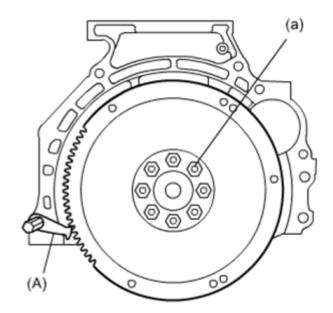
Identifying Flywheel Bolt Courtesy of SUZUKI OF AMERICA CORP.
